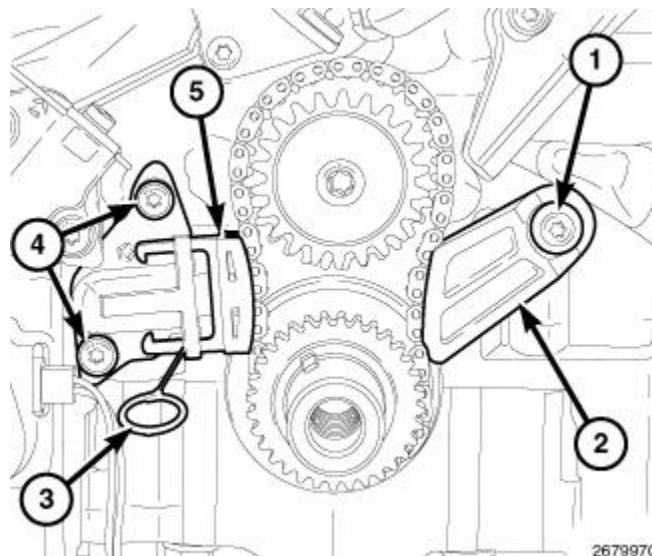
Primary Chain Tensioner, Tensioner Pin, Primary Chain Guide & Bolts
